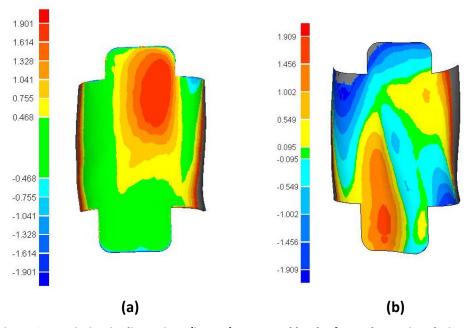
Variation in dimensions (in mm) presented by the formed parts in relation to the CAD model. a) Front part. b) Back part.
